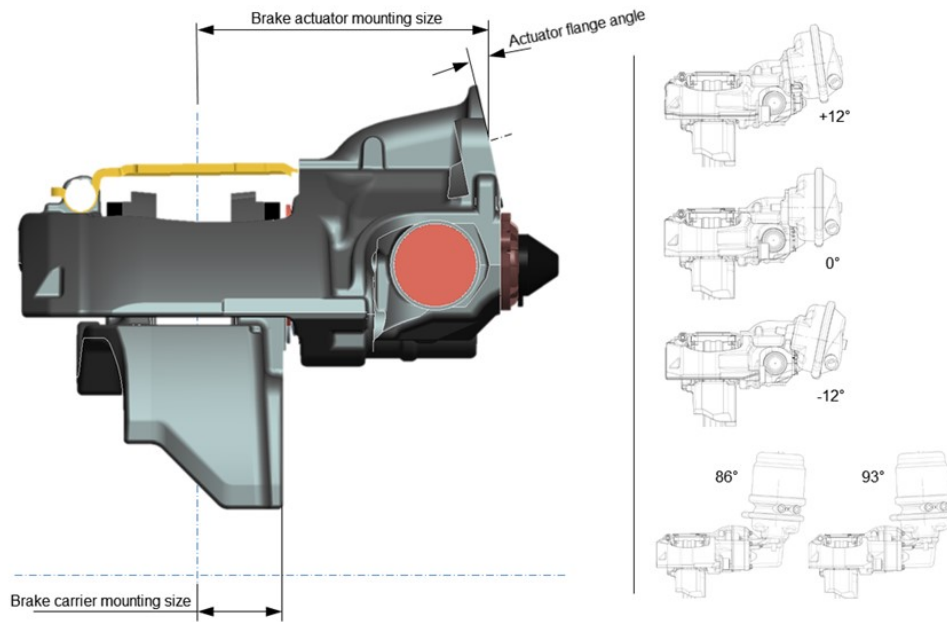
Dimensions of the air disc brake interfaces relative to the wheel center ⁽⁰⁸⁾
